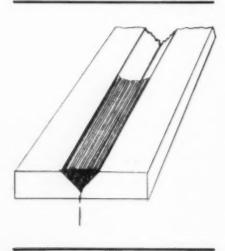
trough ends should be closed so that the melt will be confined and not peter out at the ends. Figure 6 shows the trough closed at the ends with several beads, about 2 inches, of hand weld. The above figure shows another method where steel blocks are hand welded to the trough ends. These are either burned or rounded off after the Unionmelt weld job is completed.
